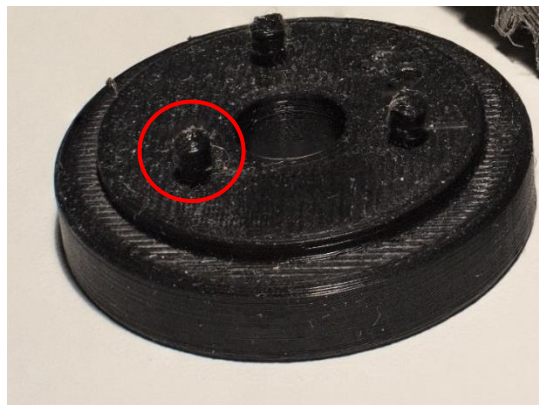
Detail of the cylinders used for the coupling of the flanges with the gear wheel
